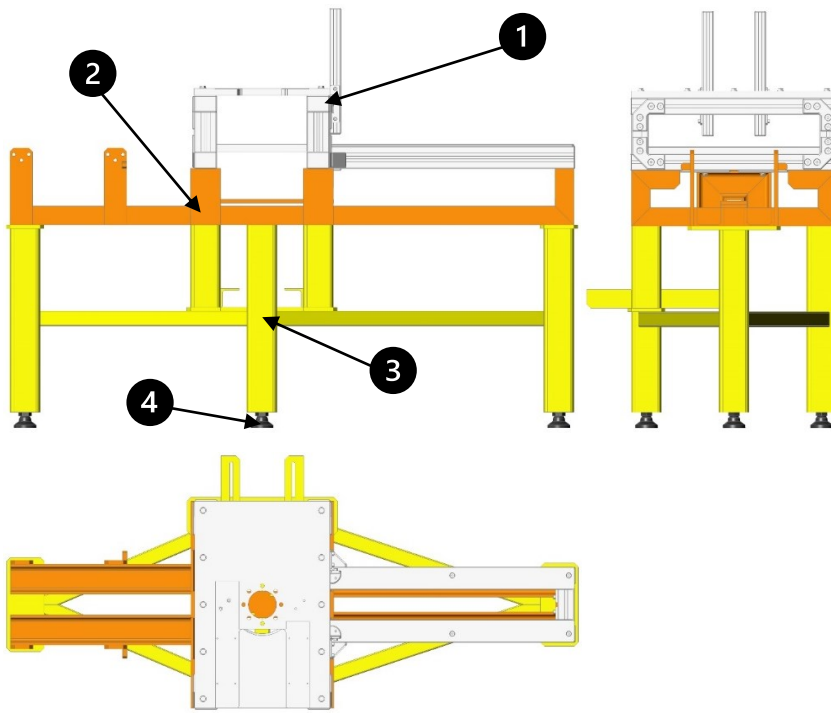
The main frame of the machine, divided into distinct sections. (1) Profile frame. (2) Reinforcing section. (3) Support section. (4) Leveling feet.
